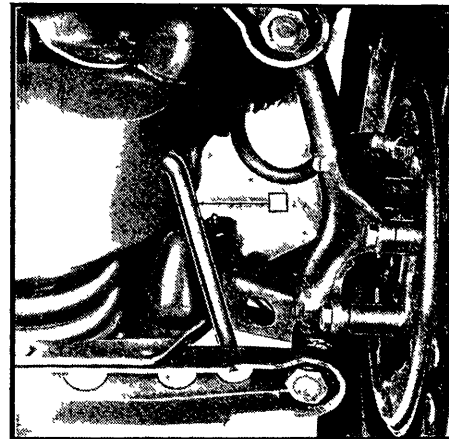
Showing spring holding hook (1) in place. Hook is used to hold spring compressed when removing steering knuckle pin or trunnion. 1950-51 Statesman and Ambassador
